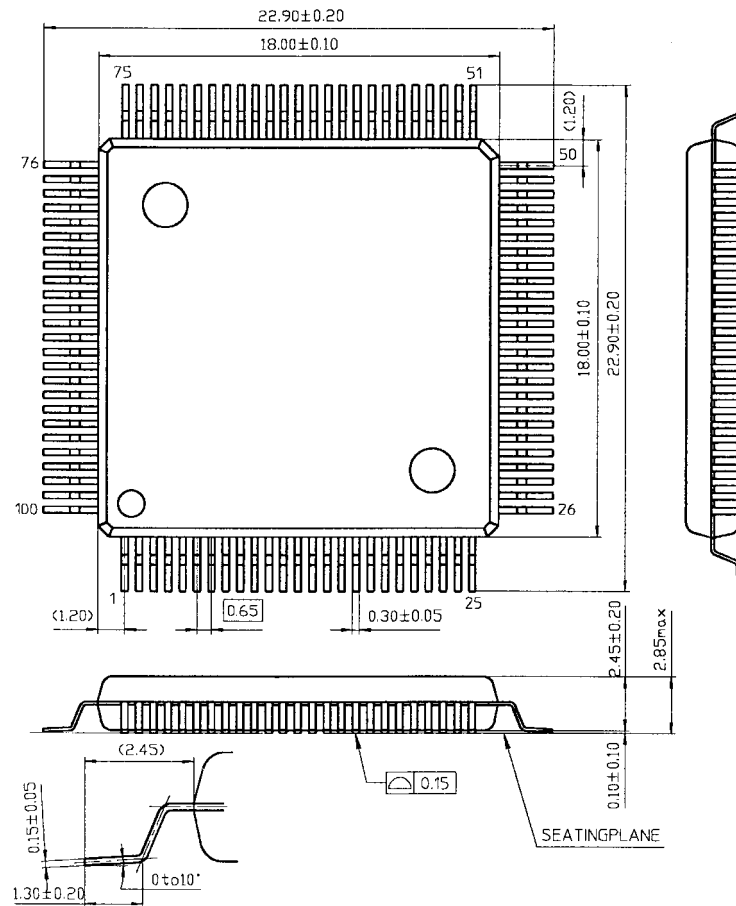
Package Dimension (QFP100-P-1818B)
